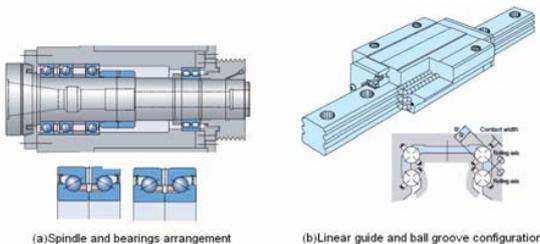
Configuration spindle bearings and rolling ball grooves within linear guide
